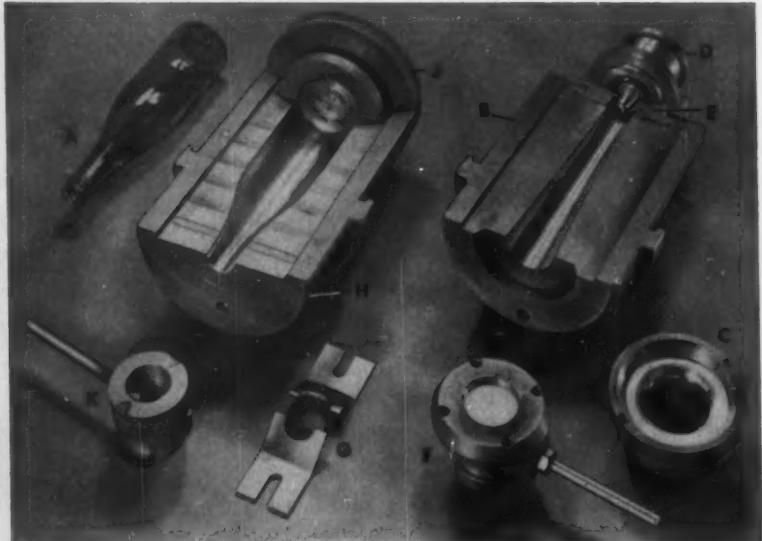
Lower-cost glass-mold tooling for a "pop" bottle (A) requires the mold halves shown assembled from components made on modern turned on W&S chuckers. Of these, turret lathes and single-spindle automatic chuckers.
